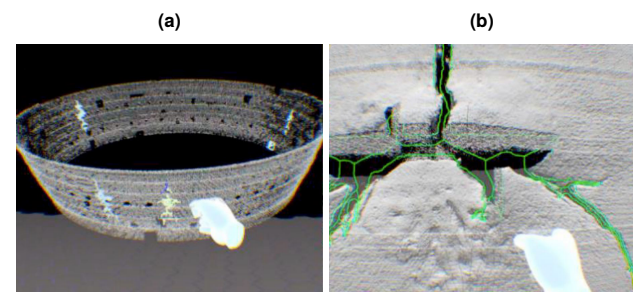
(a) Virtual Reality inspection of combustion chamber (b) with typical defect [55].
